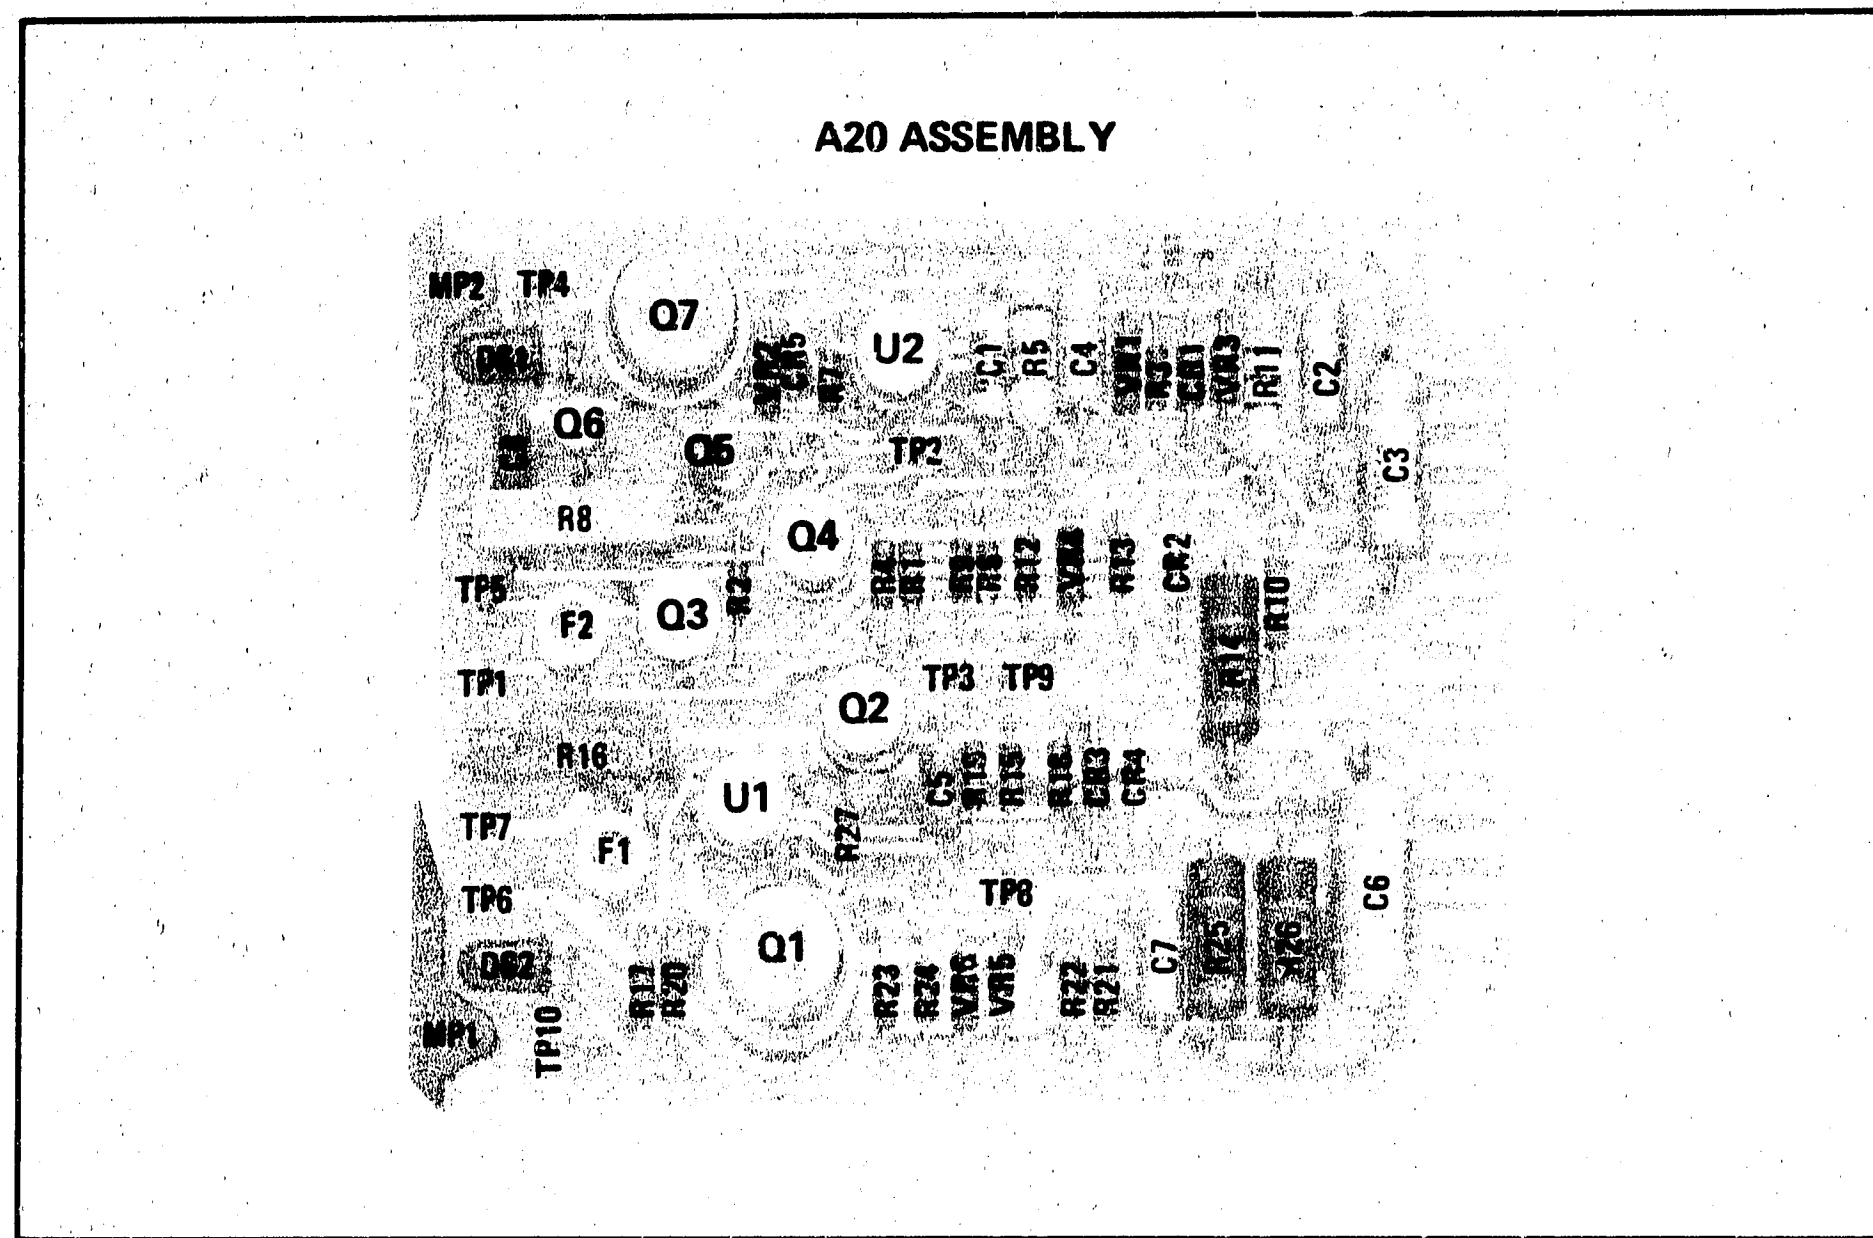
A20 +5.2 and +44.6V Regulator Assembly Component Locations
